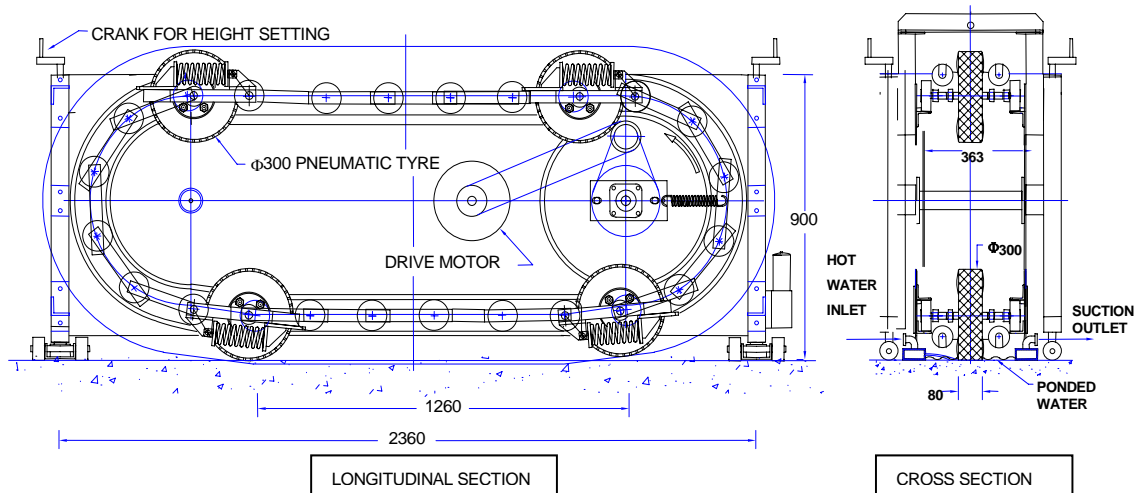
Cross-sectional Image of the MMLS3 Accelerated Wear Testing Machine.
